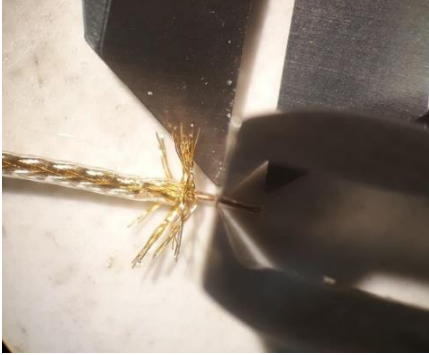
Using the end cutters and gentle pressure, carefully remove 1.6 mm of the inner insulation. In the photo to the left the callipers (which are now set to 1.6 mm gap) were used to judge the length of the insulation to be removed
